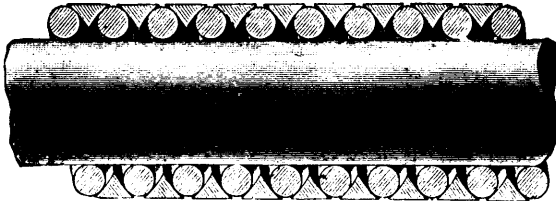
TUBE BEFORE THE MANDREL IS WITHDRAWN.
